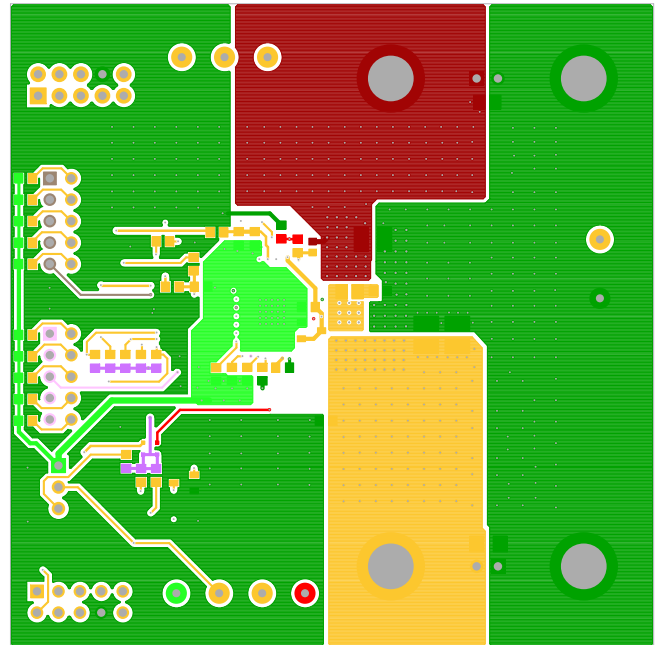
BOTTOM LAYER SOLDER SIDE
